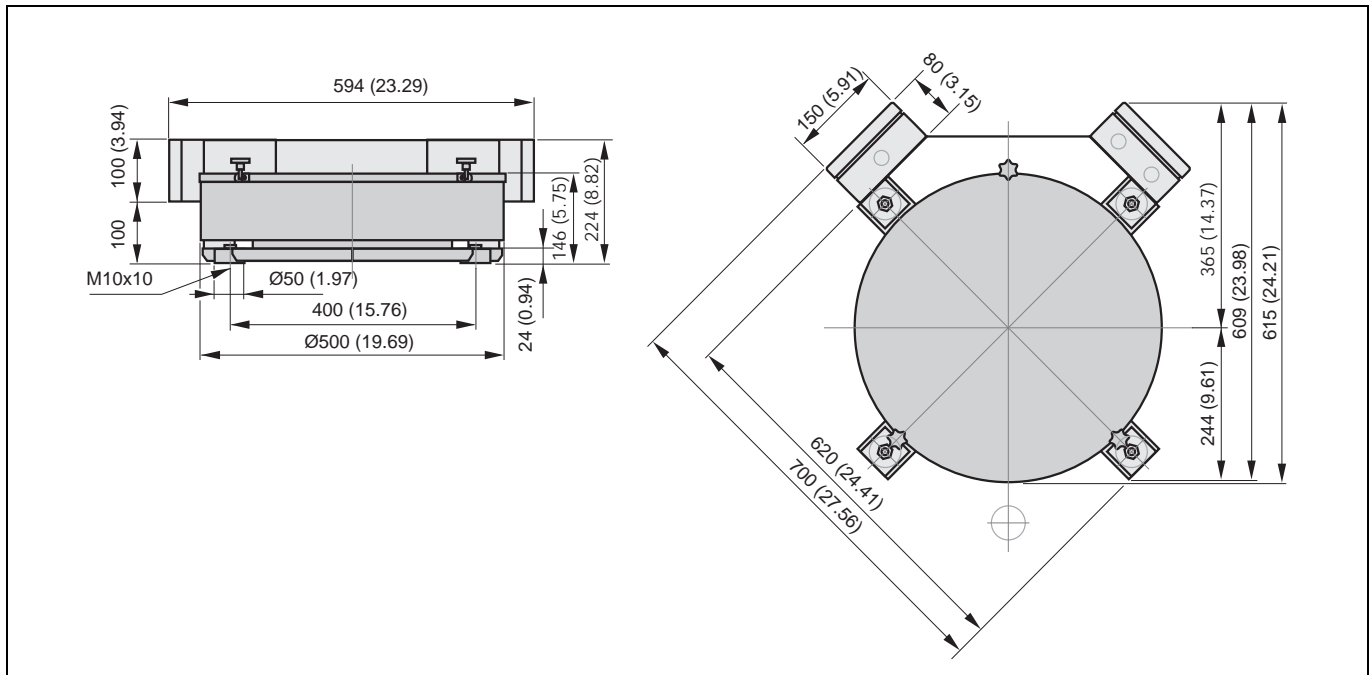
Dimensioned drawing (All dimensions in mm (in))
